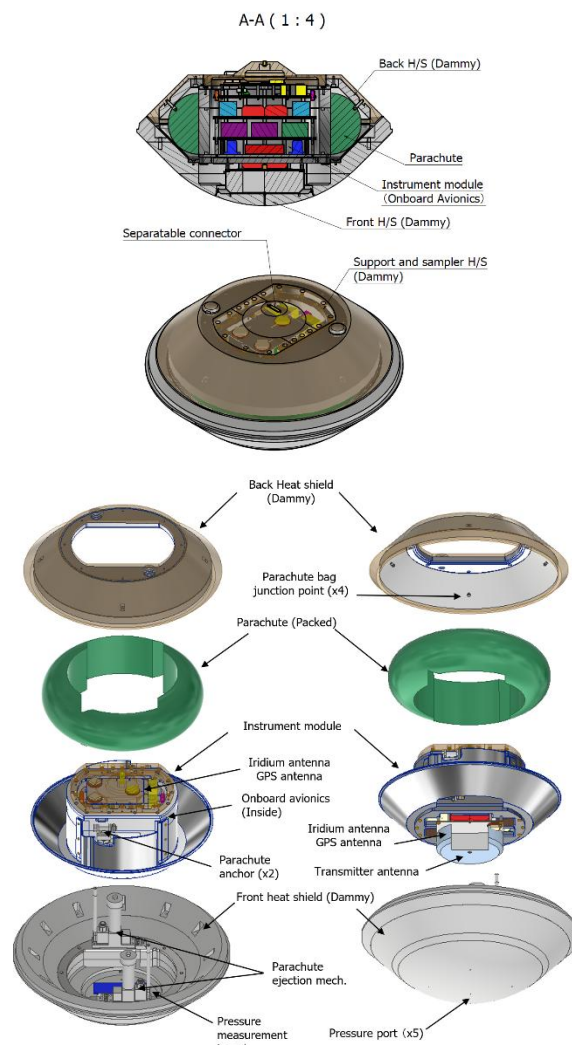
Cross section view(upper), bird's-eye view(middle) and exploded view (bottom) of CAD model of the SRC experimental vehicle
